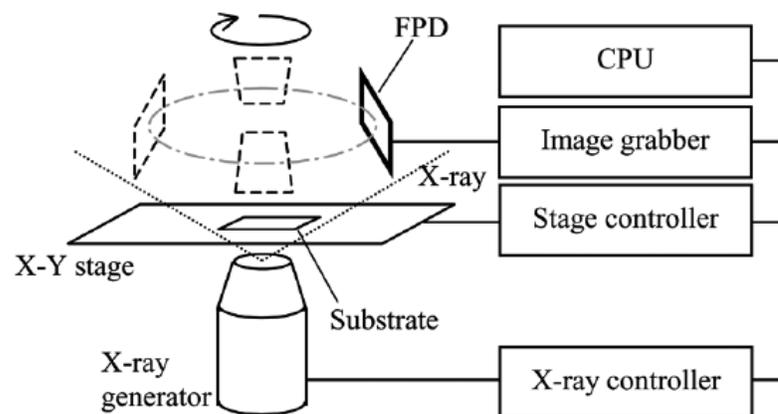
Schematic layout of OCT inspection system (Source: Teramoto A., 2007)
